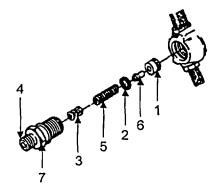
DELIVERY VALVE REASSEMBLY
